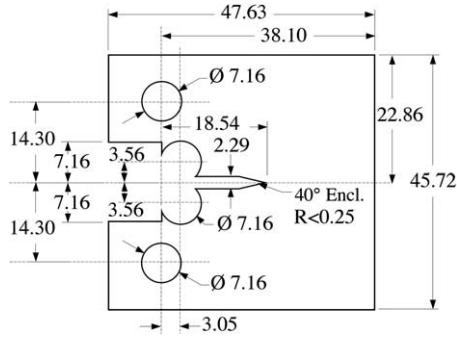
Compact tension (CT-1/2) fracture specimen geometry with integrated load-line knife-edges for COD gage. (All dimensions in mm).
